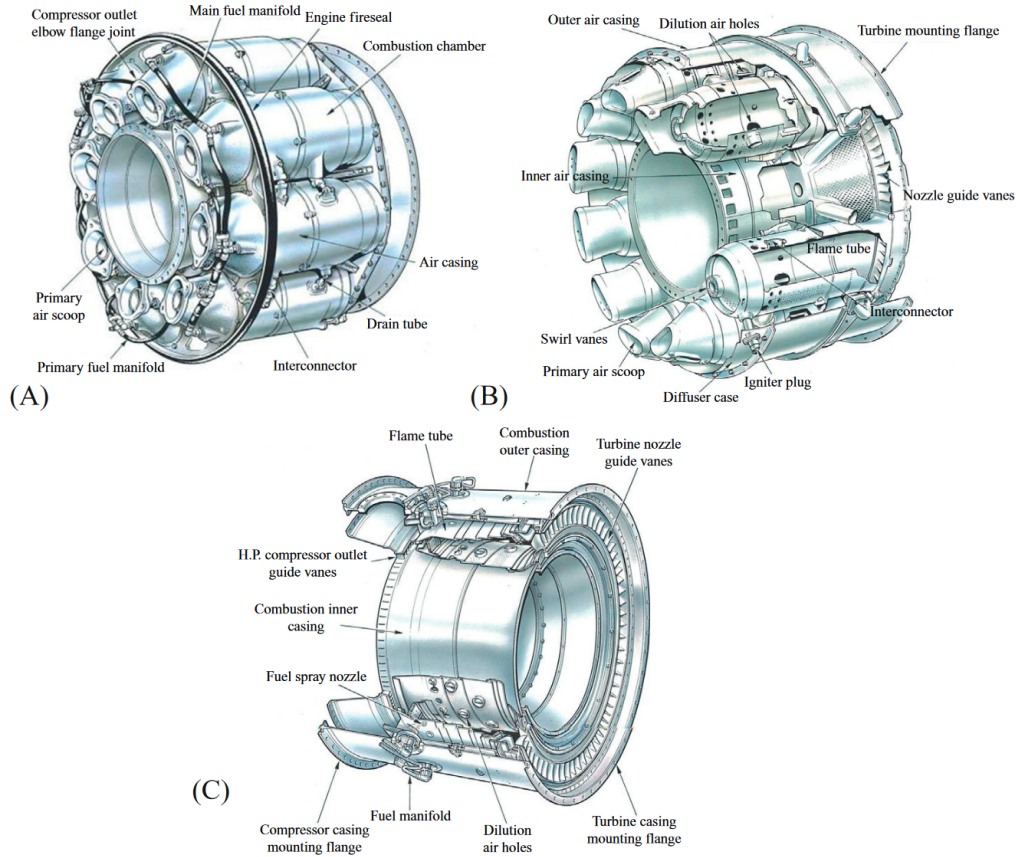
Three types of gas turbines combustion chambers: (a) can-type combustor; (b) can-annular (or tubo-cannular) combustor; and (c) annular combustor. Adapted from [22].
